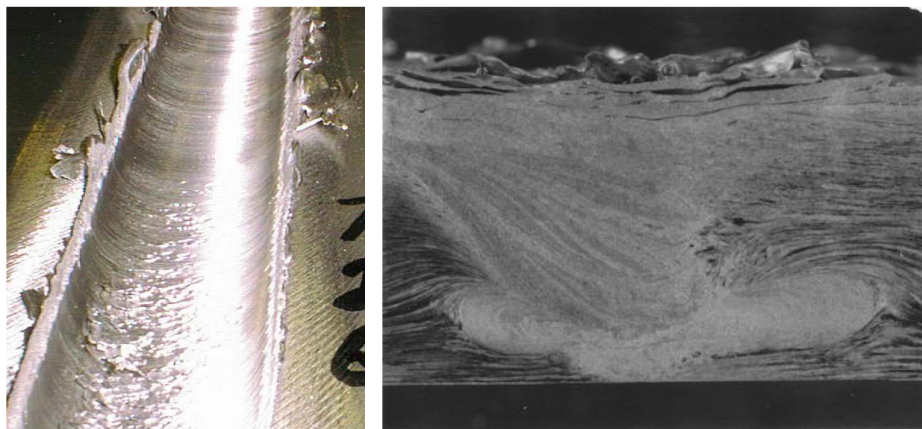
Weld with a surface-galling defect. ([Mishra and Mahoney, 2007](#))
